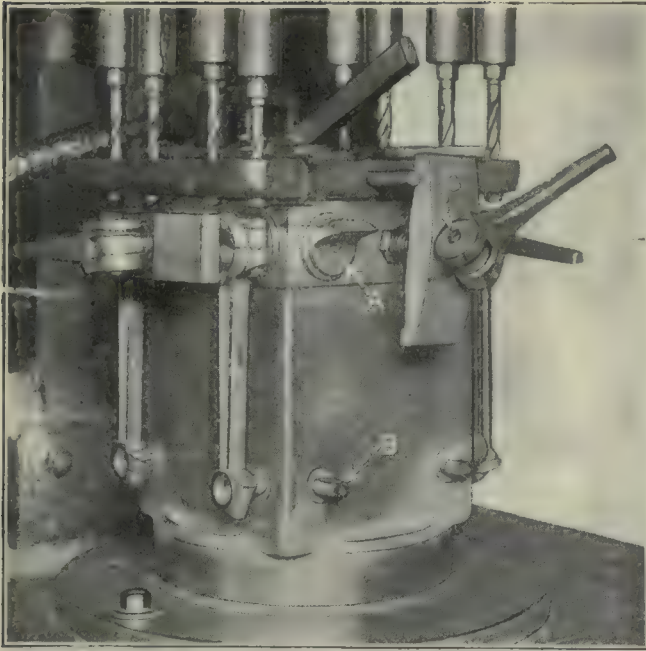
DRILLING THE BOLT HOLES IN LARGE END
